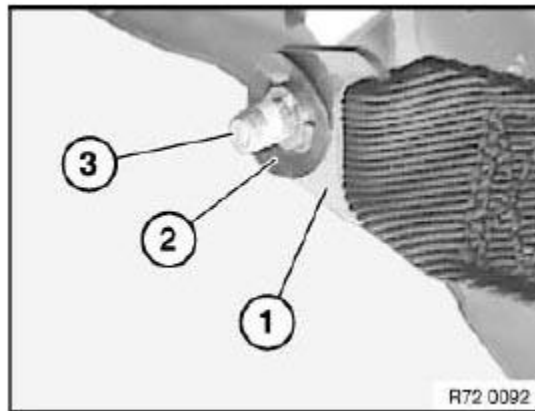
Identifying Anchor Fitting, AHPS2 Head Airbag, Lock Washer And Retaining Screw
